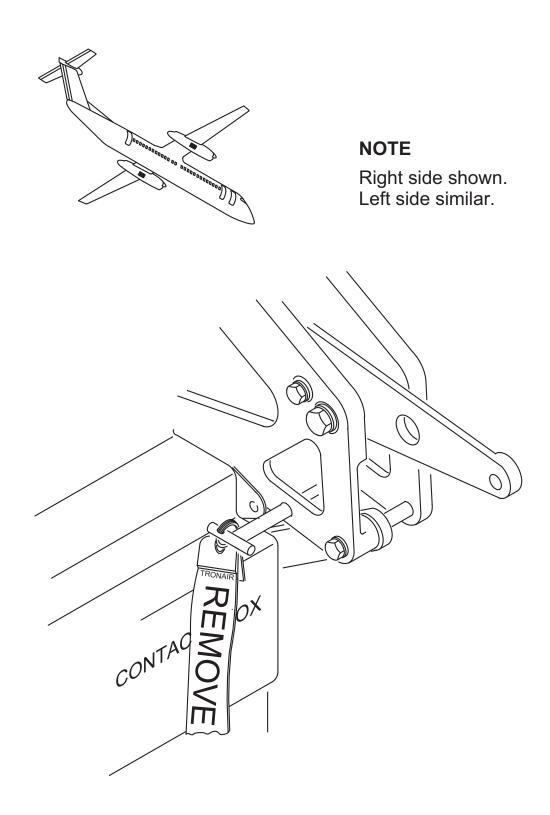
Main Gear Hydraulic Door Lock Pin
